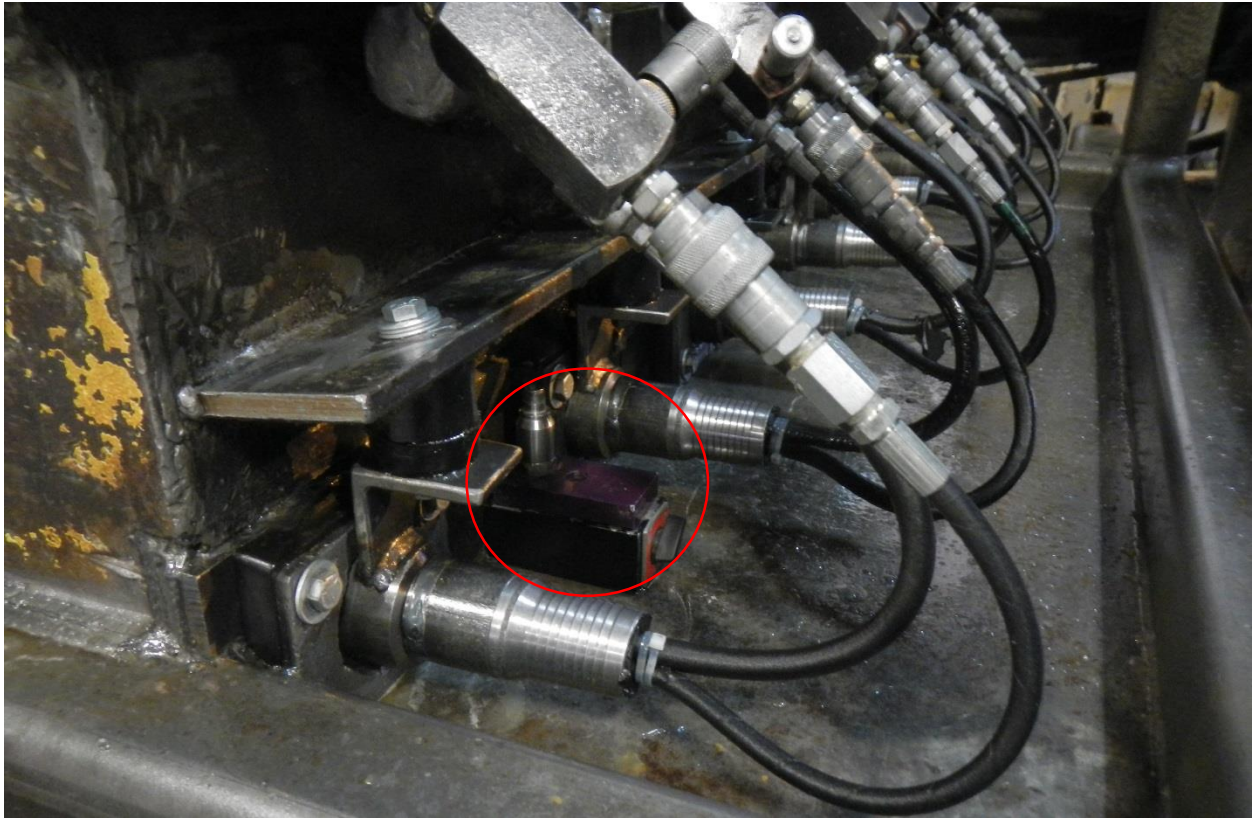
Accelerometer attached to the casting machine between two embedded vibrators
